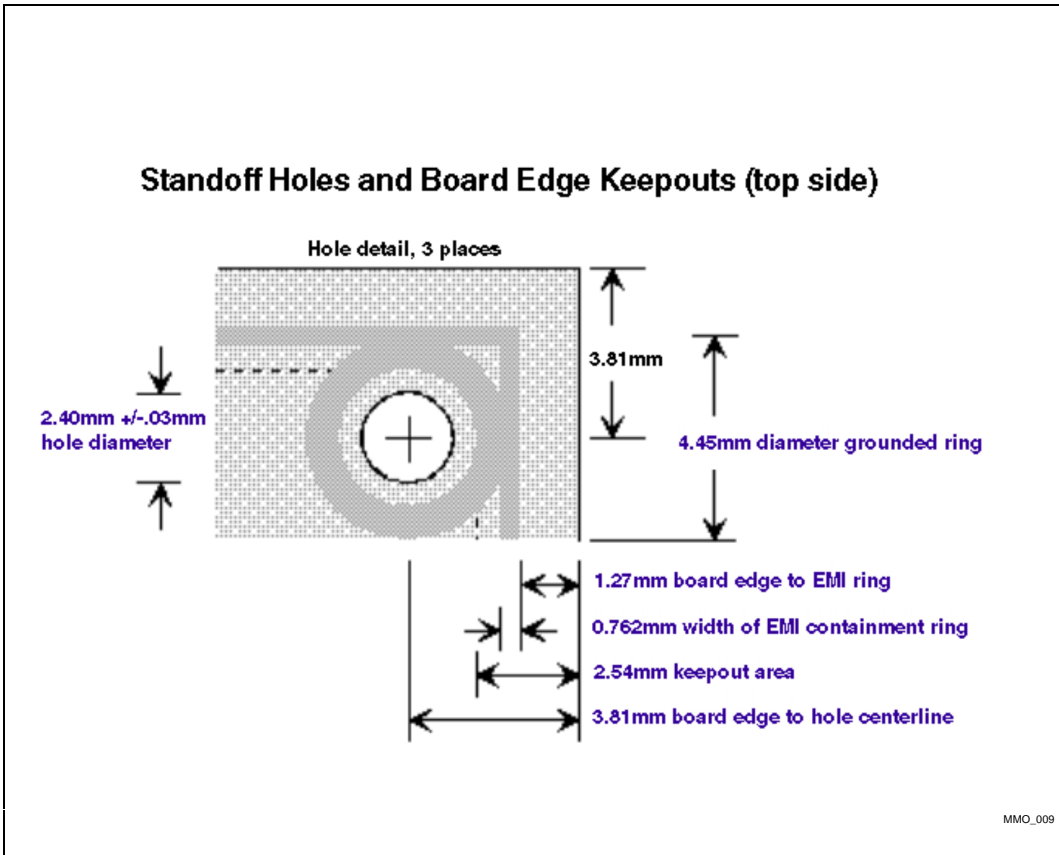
Standoff Holes, Board Edge Clearance and EMI Containment Ring
